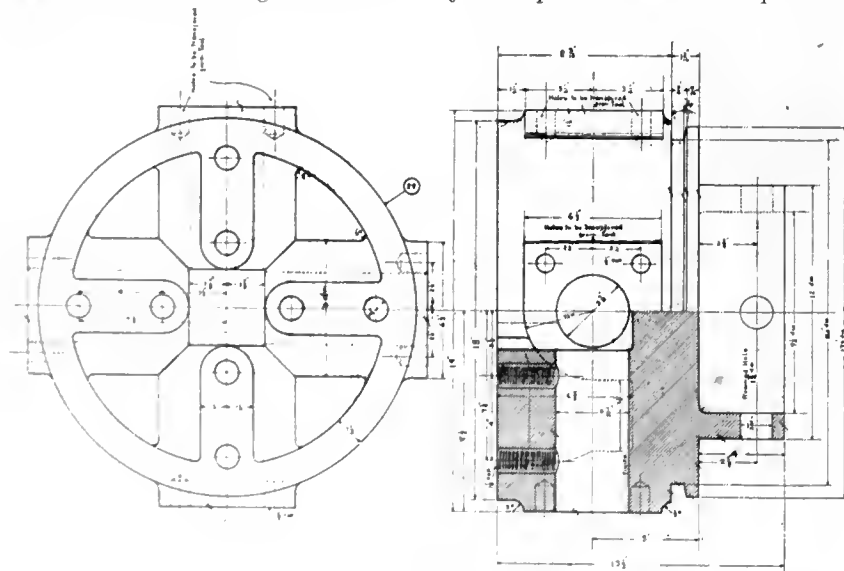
PLAN AND SECTION OF TURRET HEAD.
